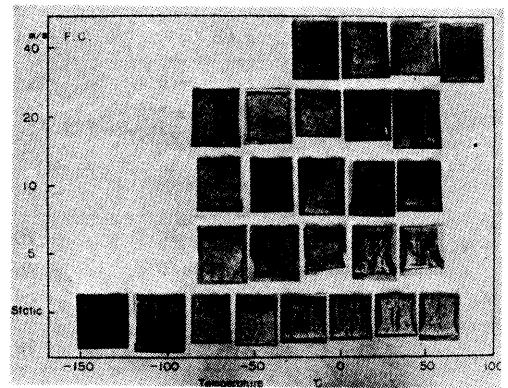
Macroscopic fractured surface in fatigue-cracked specimen for testing temperatures and bending rates.
